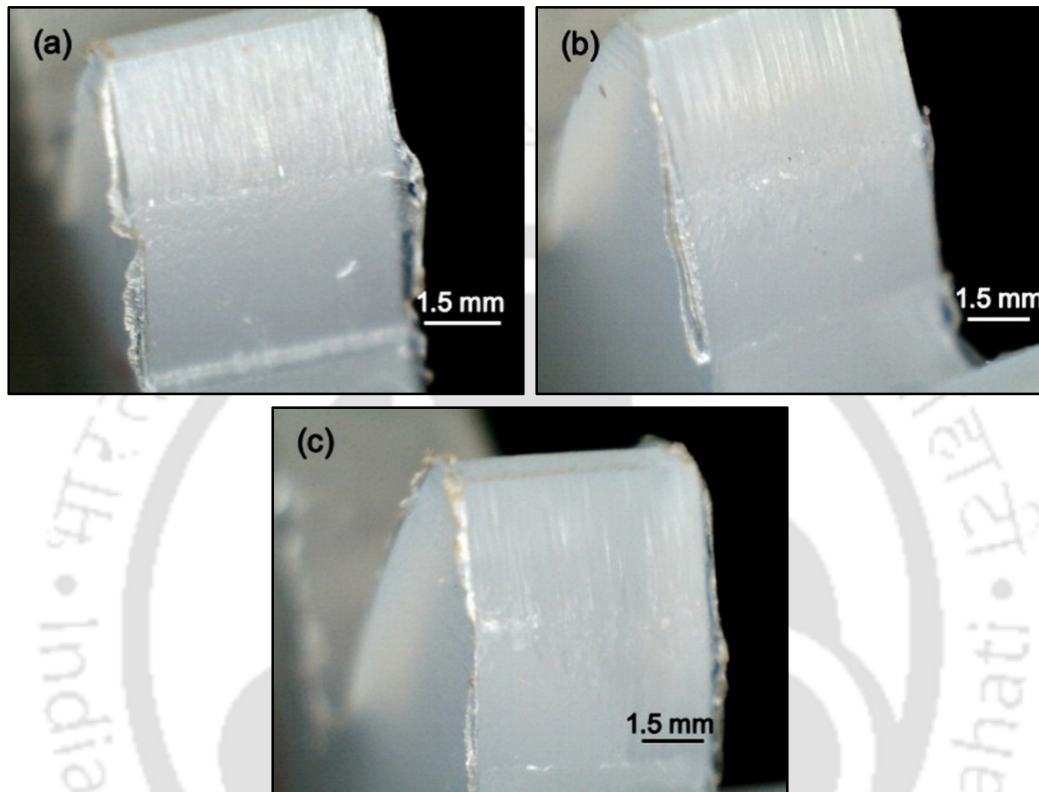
Worn out polymer gear when paired with (a) steel gear A, (b) steel gear B, and (c) steel gear C at 2 Nm after 48×10^3 cycles (3600 s and 800 rev/min)
